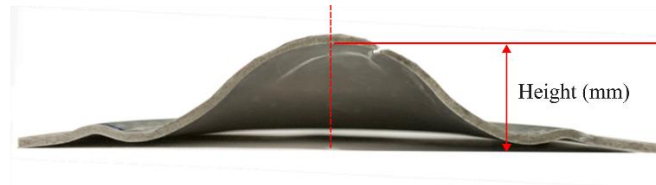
Cross-section of the LDH tested specimen showing the dome height at fracture
